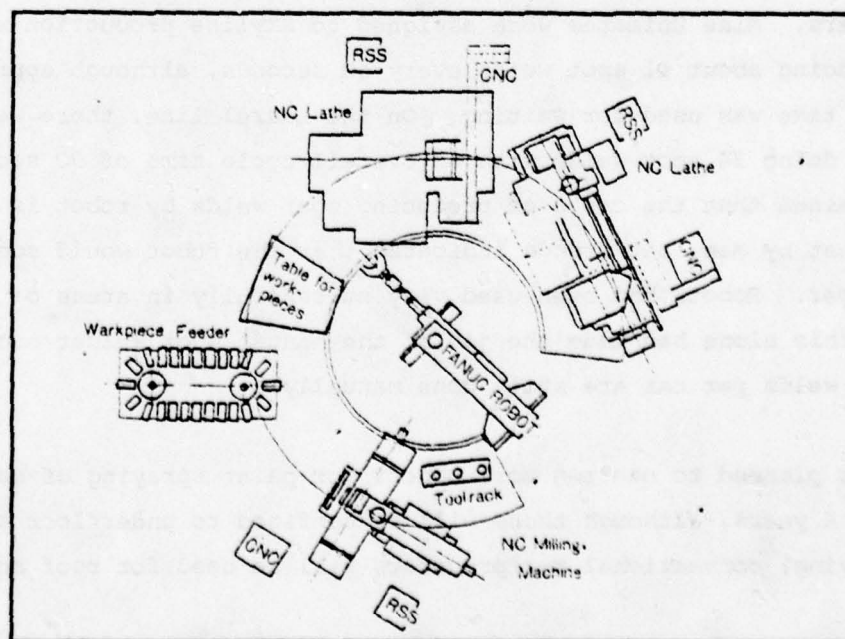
FANUC NC MACHINE-TOOL SYSTEMS
